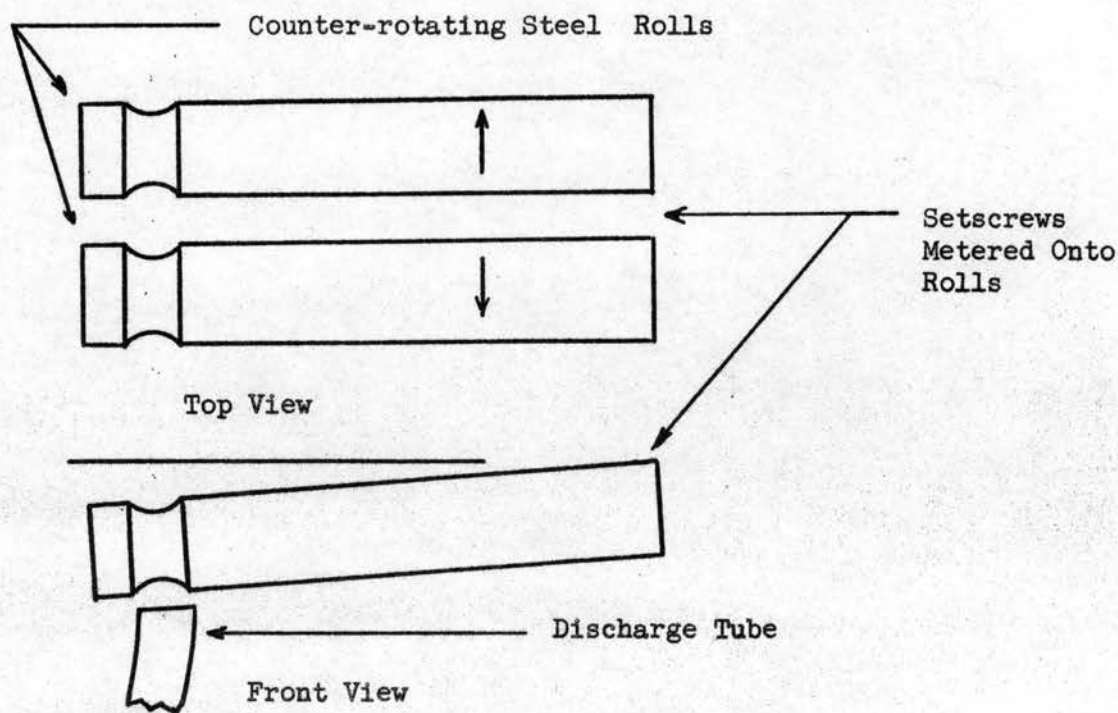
Roller grader-feeding device for setscrews and other parts - (springs, tapered units, etc.).
